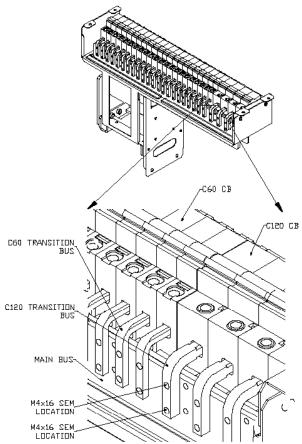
Merlin Gerin 28 CB Module Installation Detail
